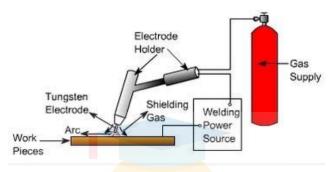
Schematic Diagram of TIG Welding System
